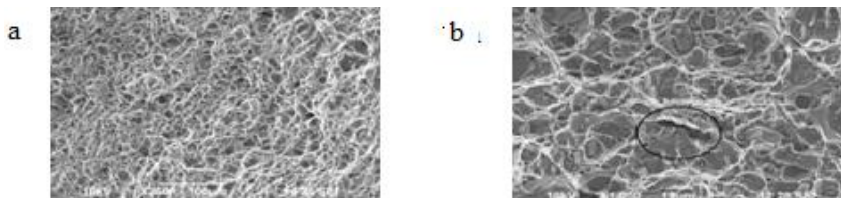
Fractography of FSW samples (a) Ductile Failure (b) Brittle failure
